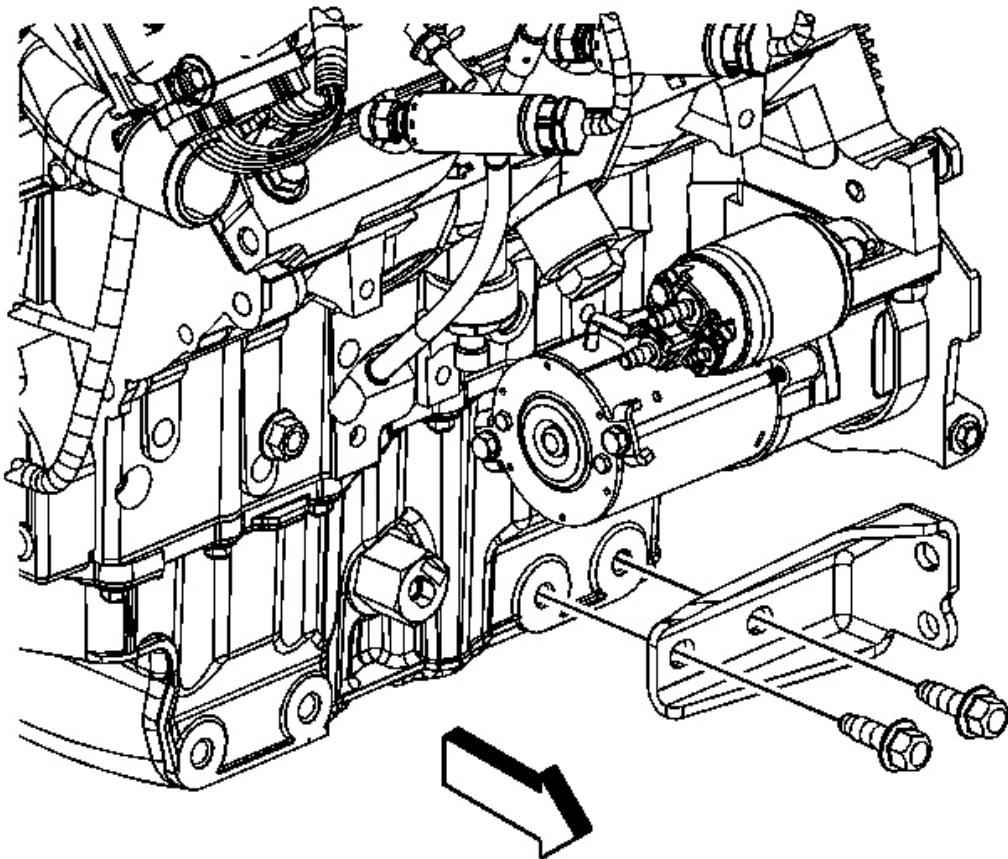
Identifying Transaxle Brace-To-Transaxle & Bolts
